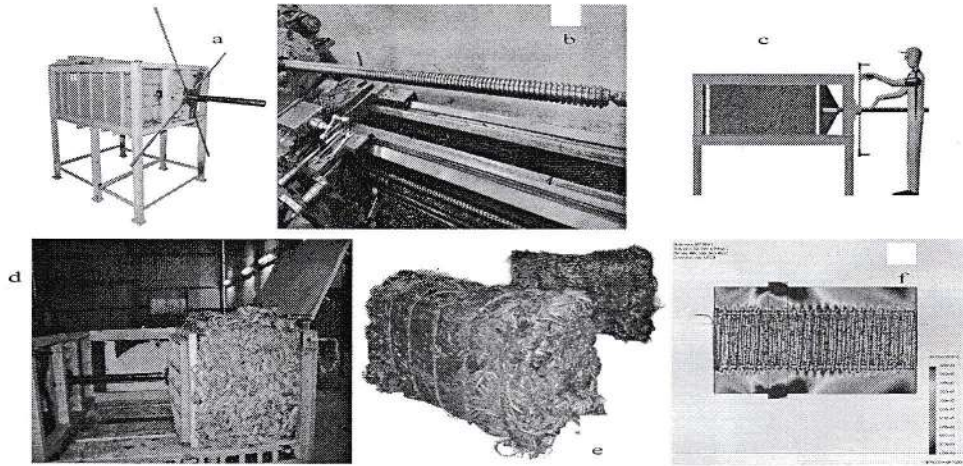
; a - Working prototype; b - Lead screw manufacturing; c – working of pressing head; d – Pressing of raw jute; e – finished bale; f - analysis of lead screw
